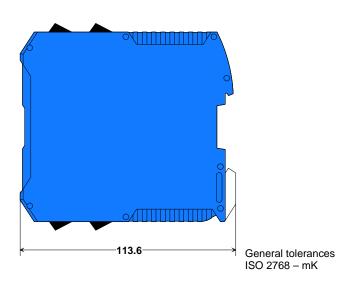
Mechanical Dimensions – I/O Expansion Module
